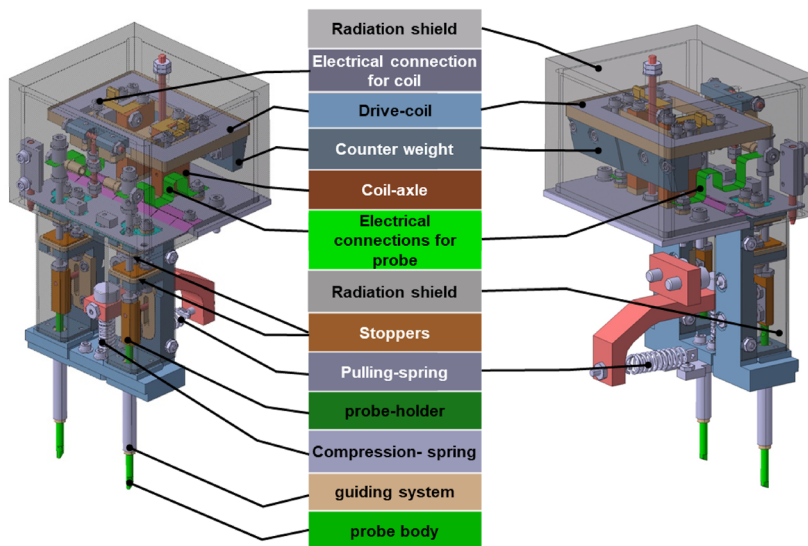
CAD models of the drive coil assembly from two viewing angles showing different components of the assembly.
